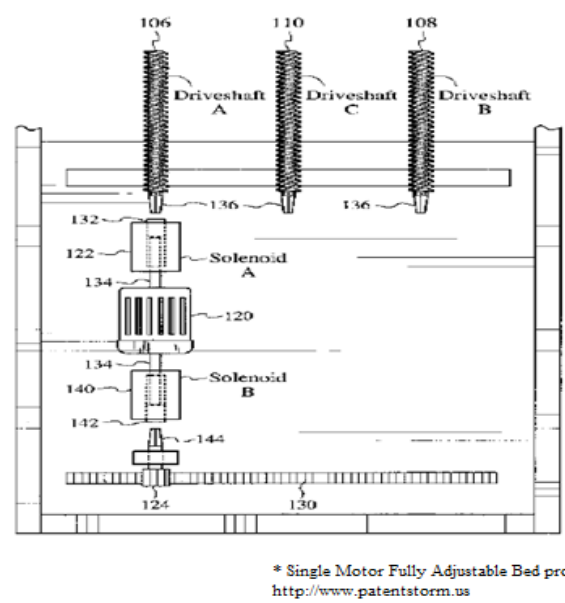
Schematic of an Embodiment of A Drive Assembly
